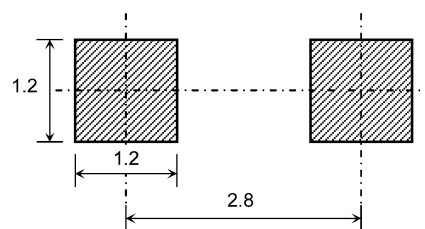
Land Pattern Dimensions (Unit: mm)
